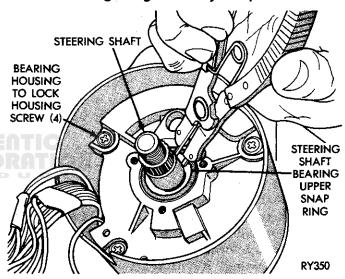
Bearing Housing Screw & Upper "Snap" Retaining Ring Removal
